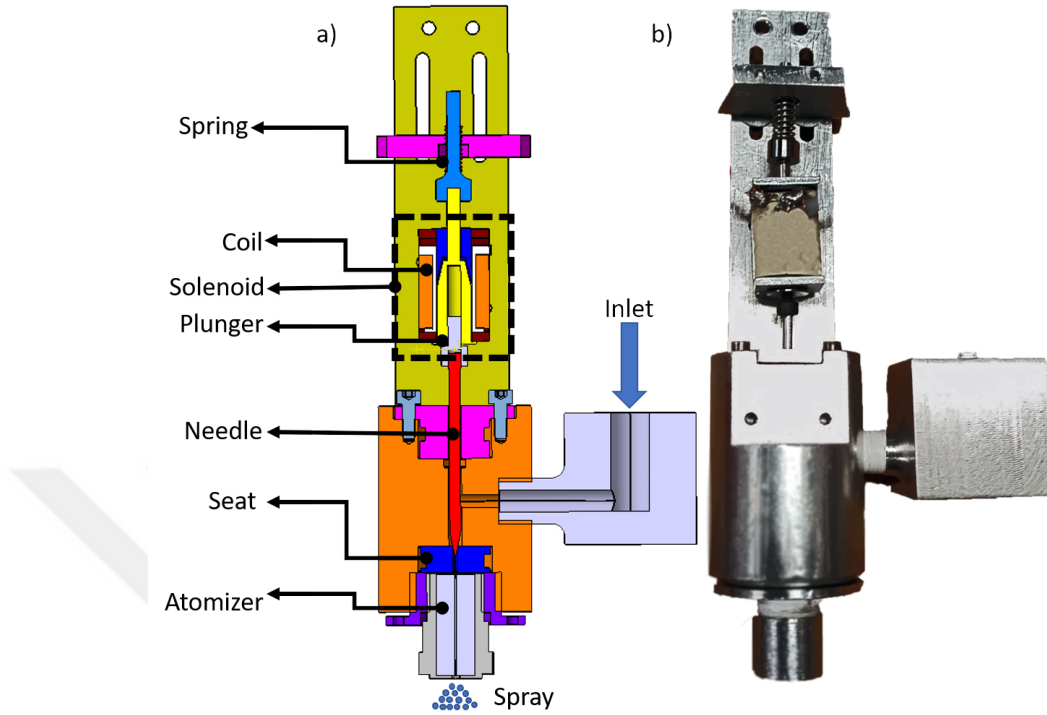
a) Cross sectional CAD view of the solenoid based prototype injector b) Prototype injector
